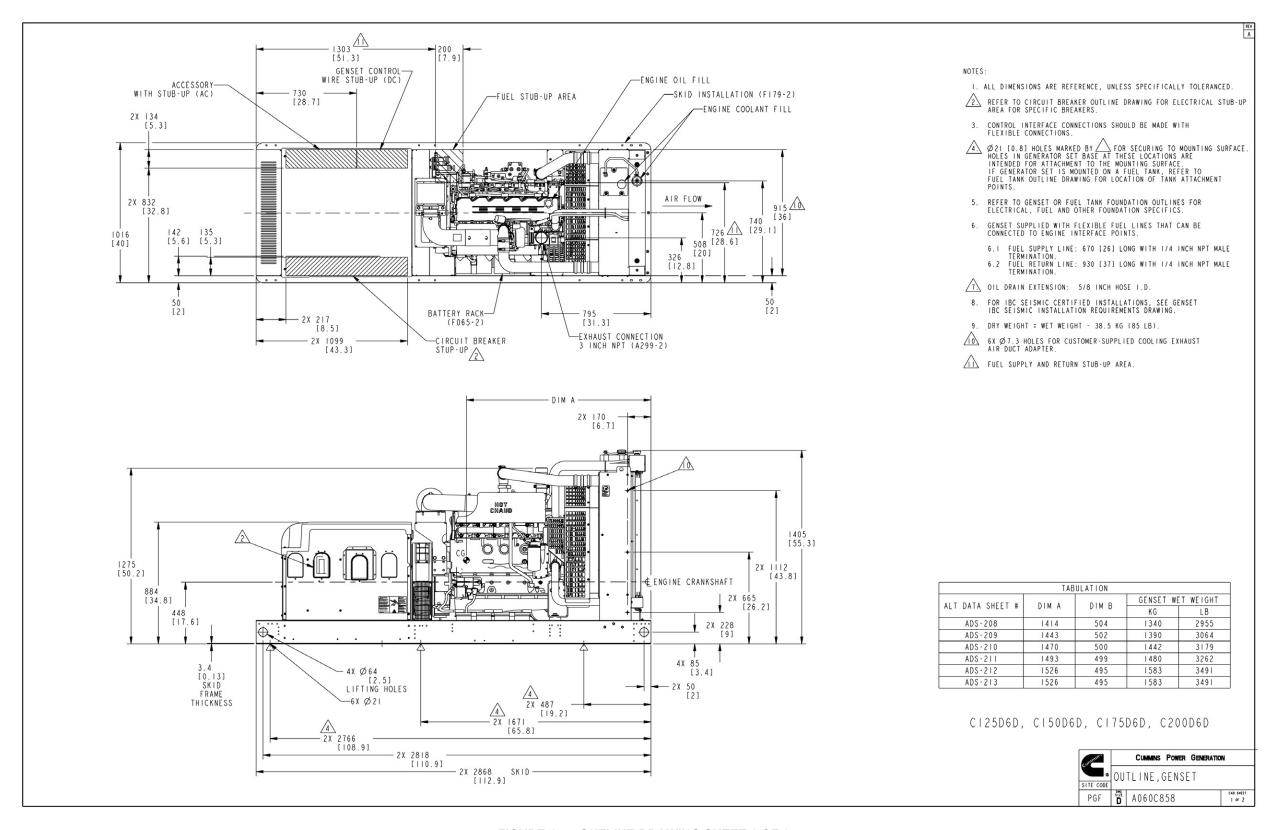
OUTLINE DRAWING SHEET 1 OF 2
